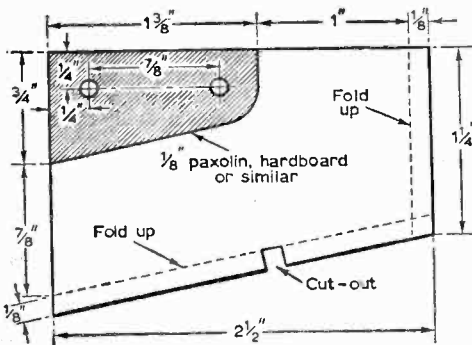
The coin channel dimensions. These measurements should be adhered to. (See text.)
